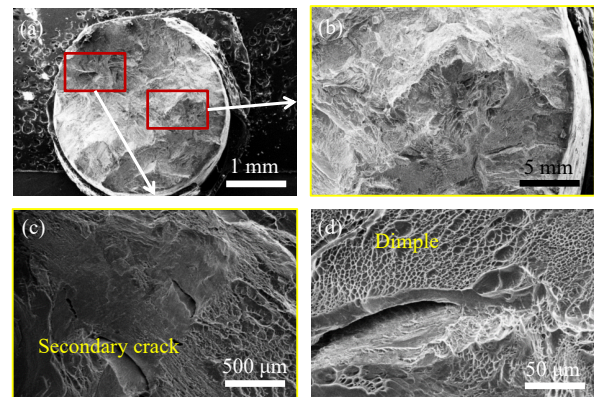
Tensile fracture morphologies of the 950°C specimen: (a) overall morphology of the fracture; (b) edge morphology of the fracture; (c) secondary crack in the fracture internal area; (d) dimple characteristics.
